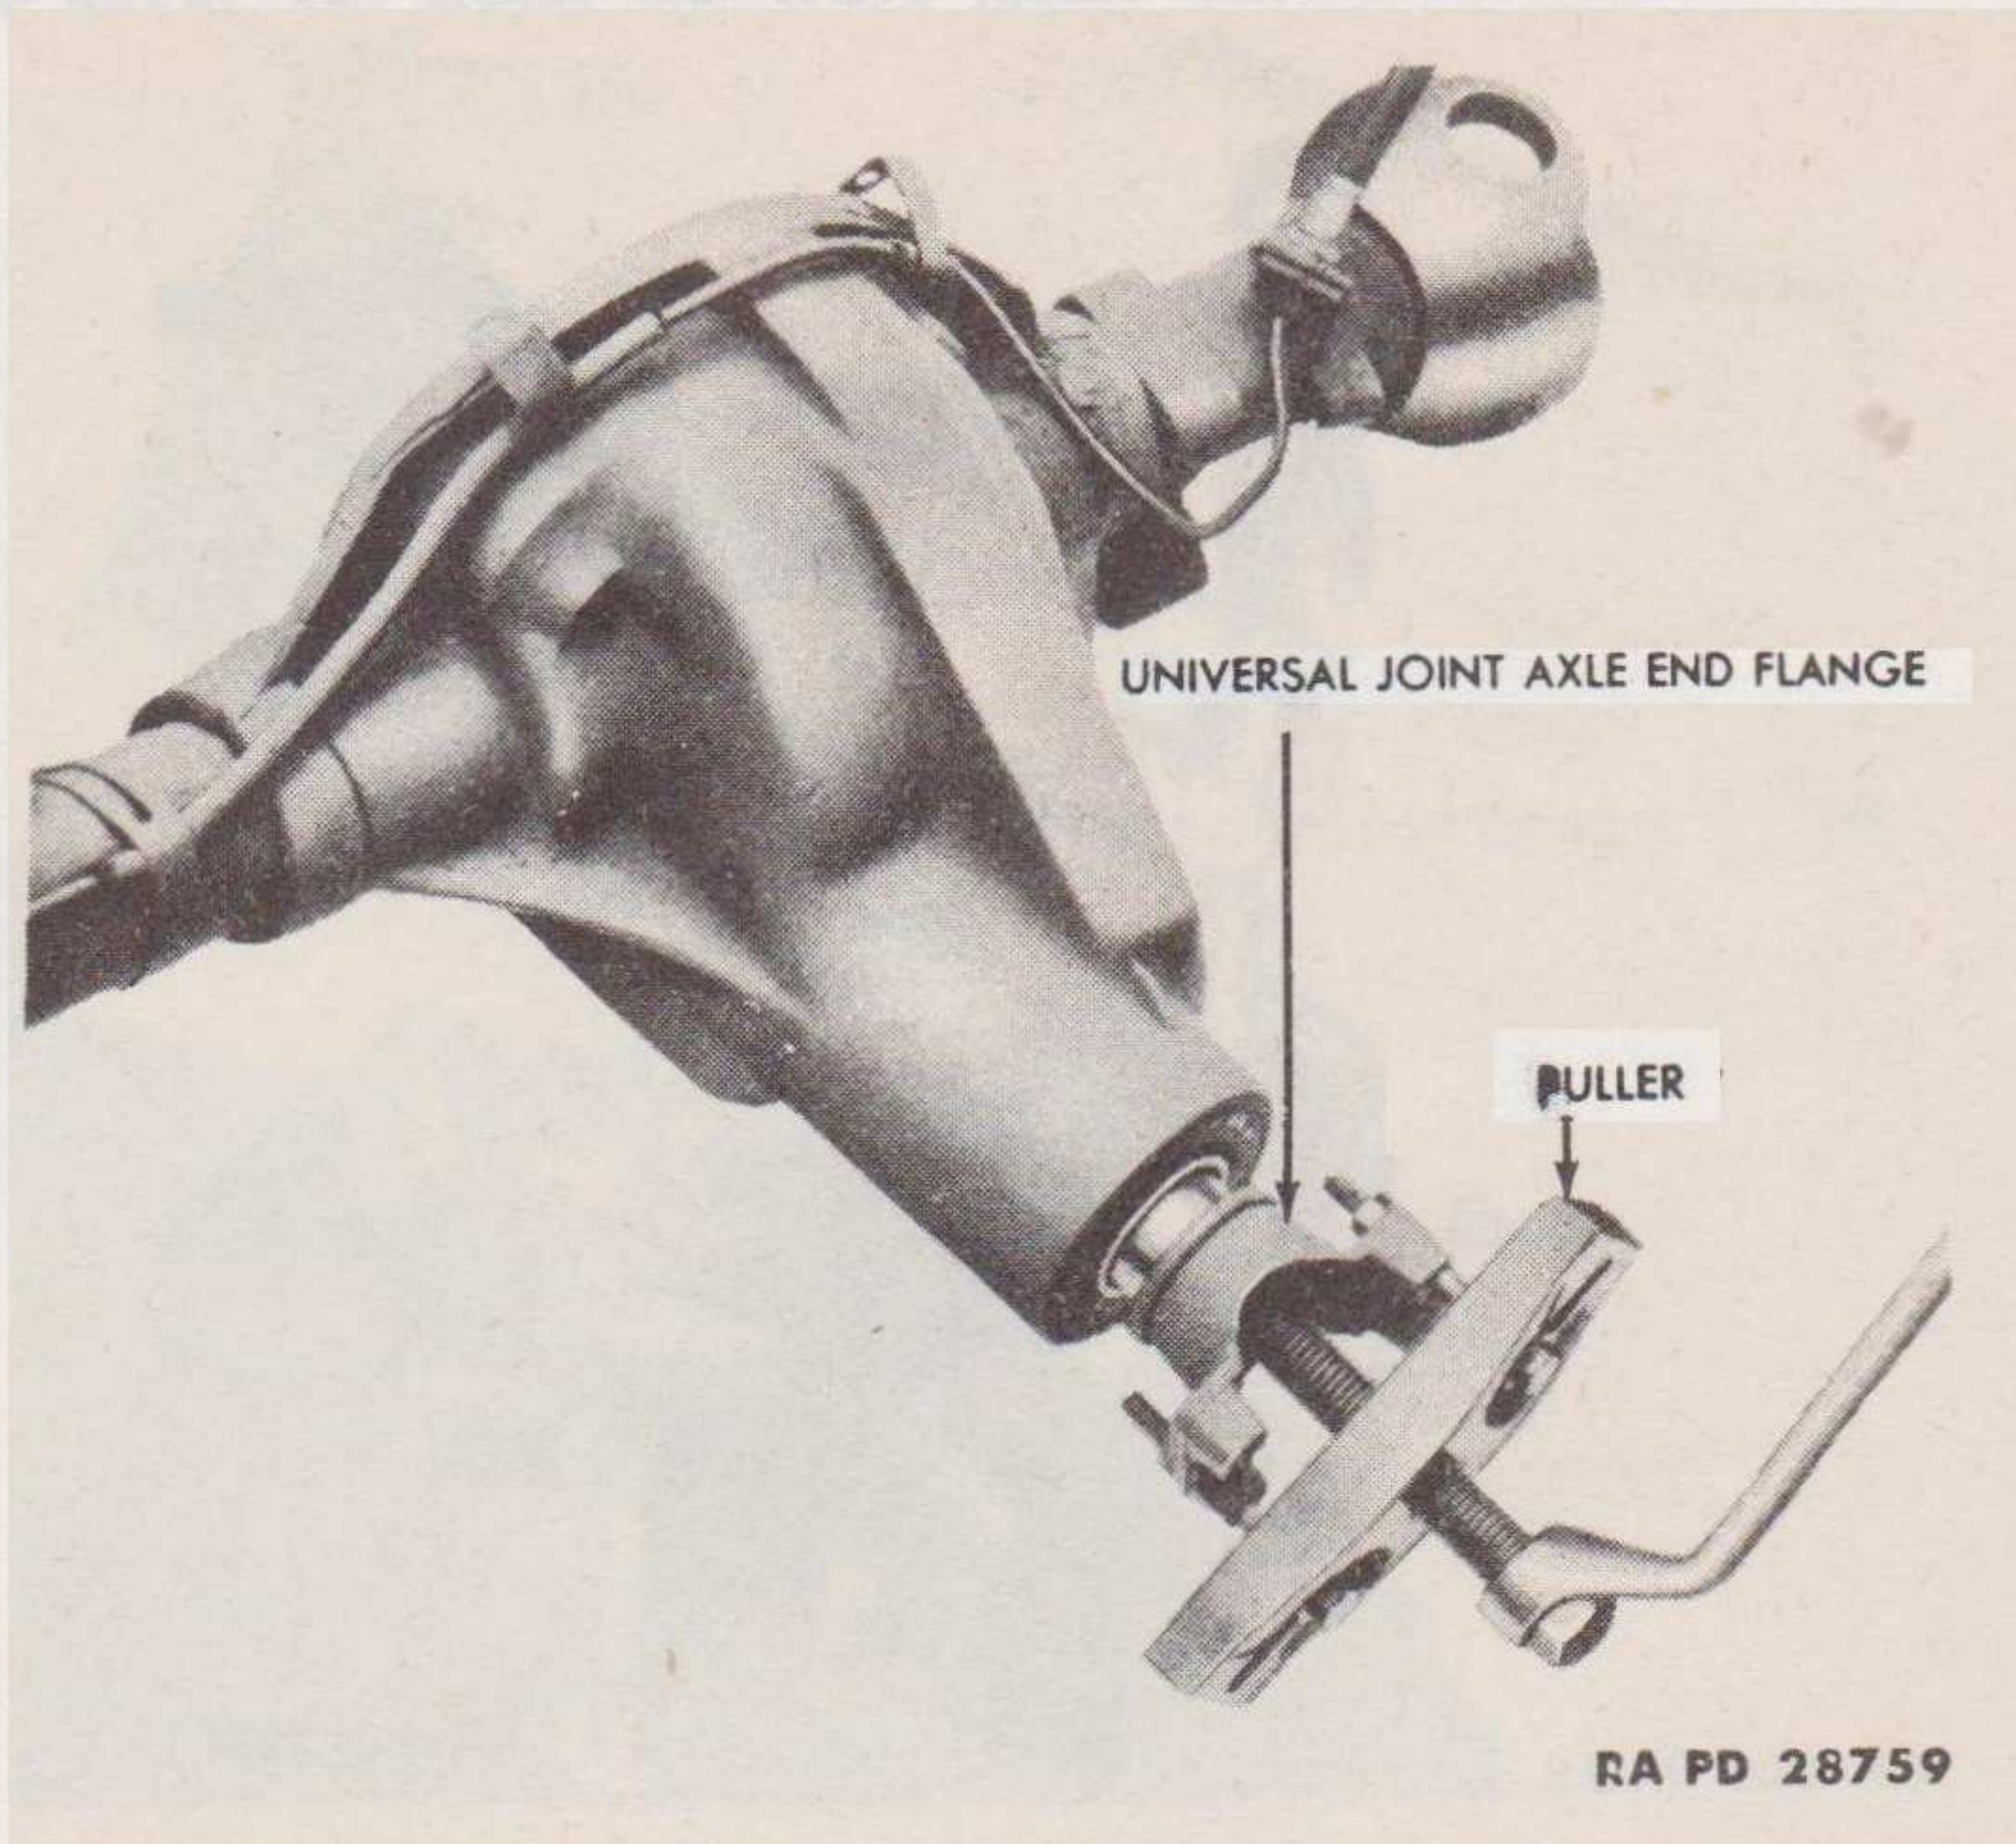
Removing Universal Joint Axle End Flange With Puller 41-P-2905-60
